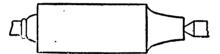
TOOL-HANDLE ROUGHED OUT.
